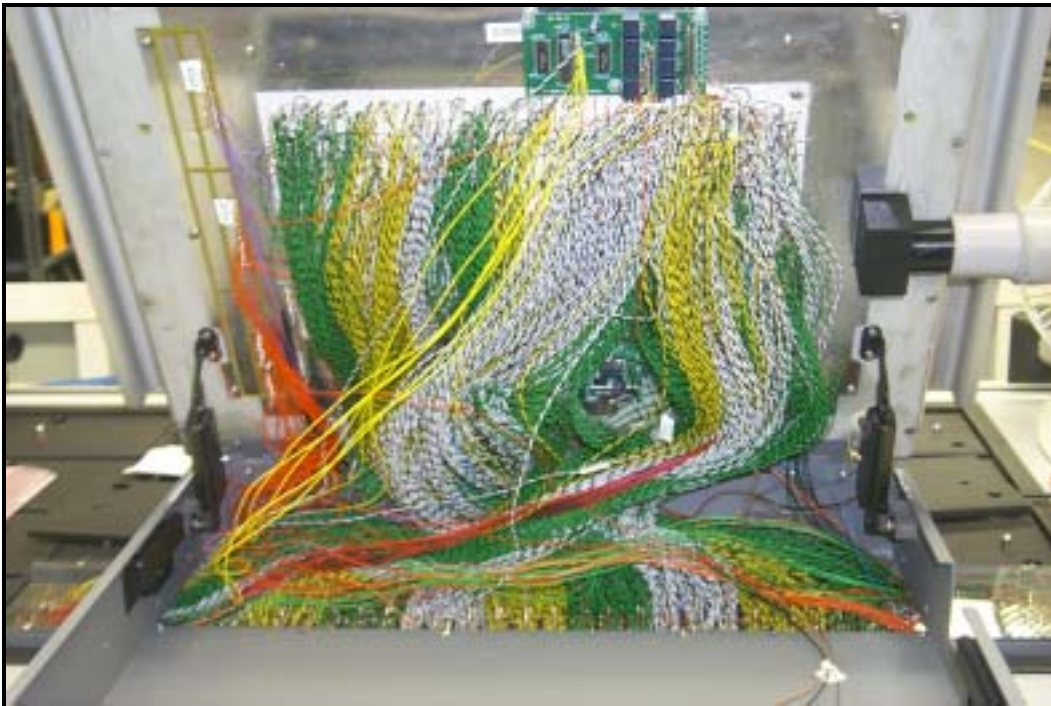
In-circuit Test Fixture for 1400 Net Circuit Board
